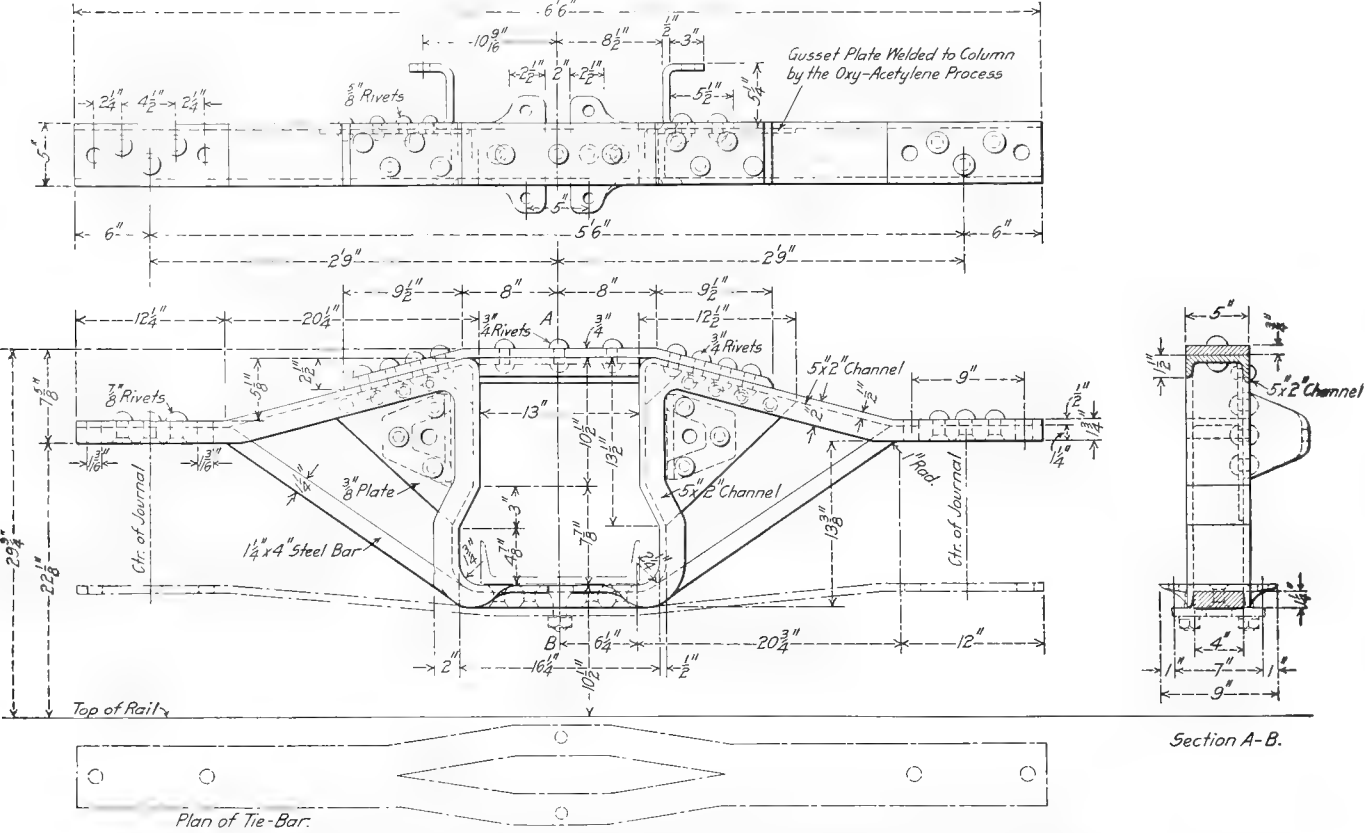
Freight Car Truck Side Frame Built of Rolled Steel Members Riveted Together. Murphy Equipment Company.
